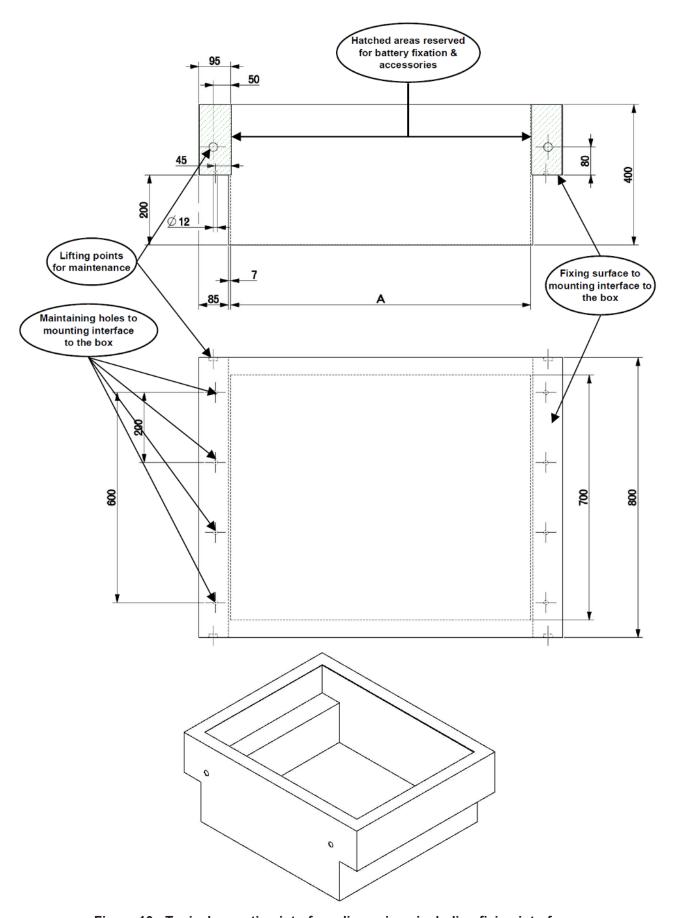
Typical mounting interface dimensions including fixing interfaces
